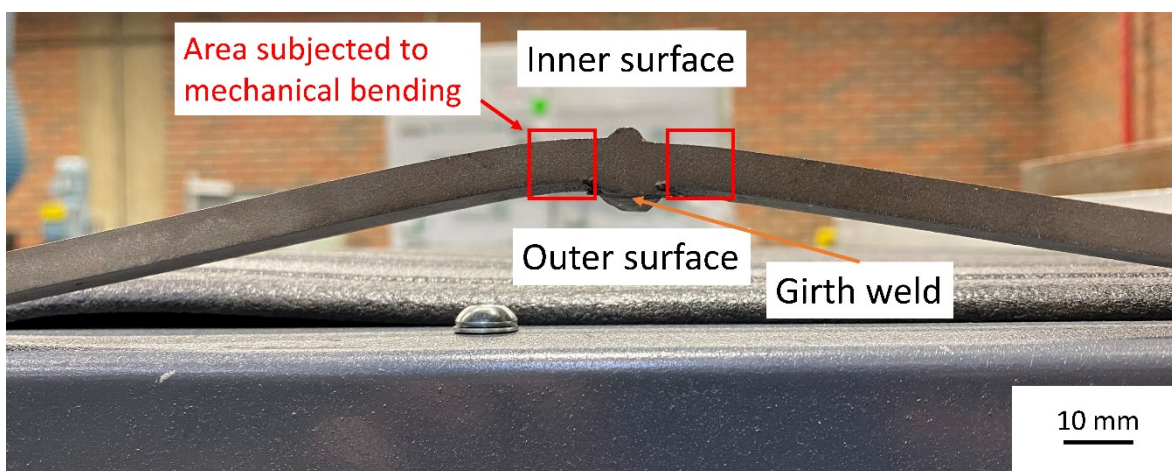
Front of a fabricated specimen ($d = 0$ mm) with the locations at which bending force was applied
